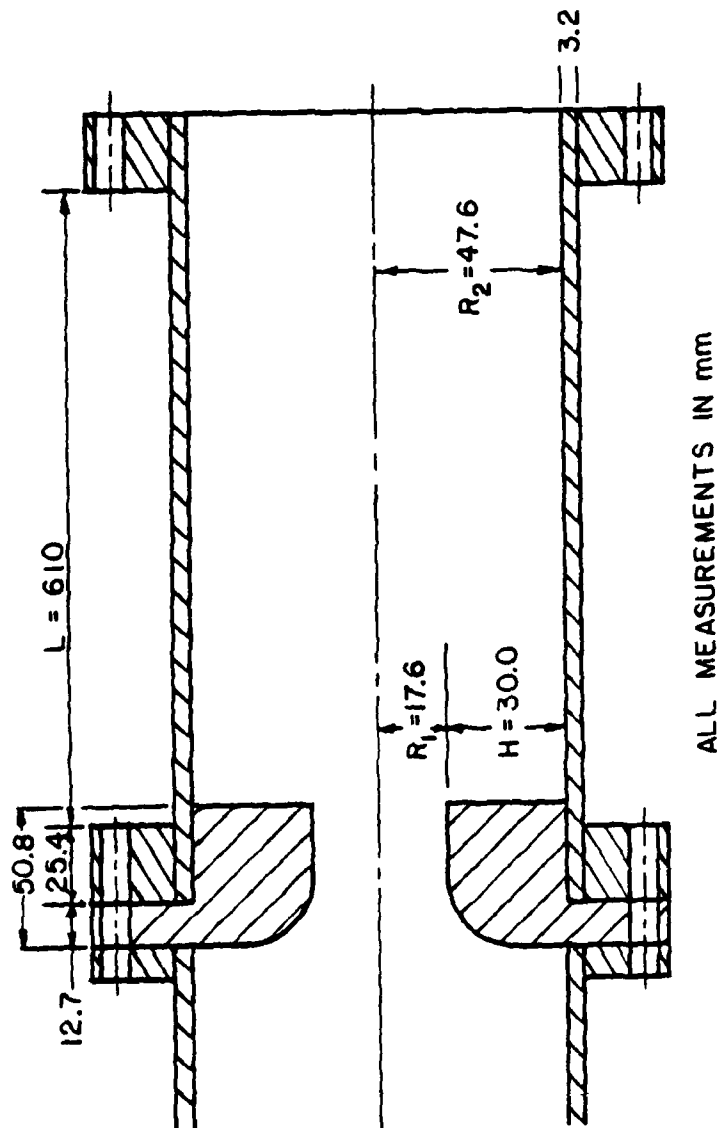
Geometry of Test Section with 2.70:1 Nozzle
